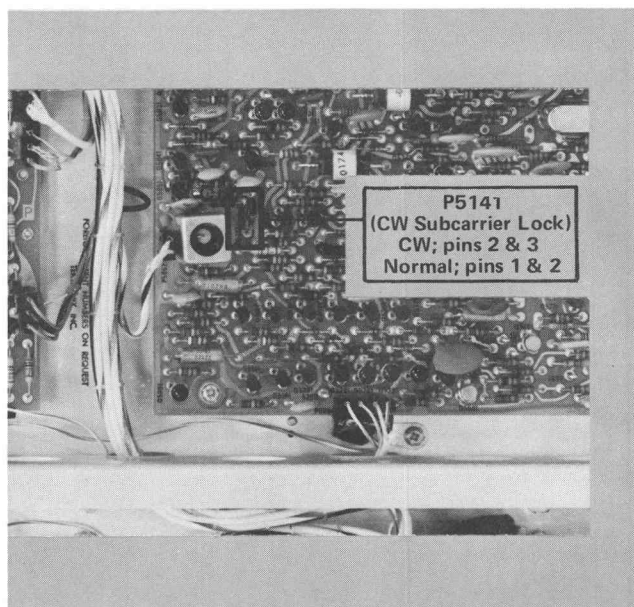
Gen-lock circuit board location of CW Subcarrier Lock selector plug.
